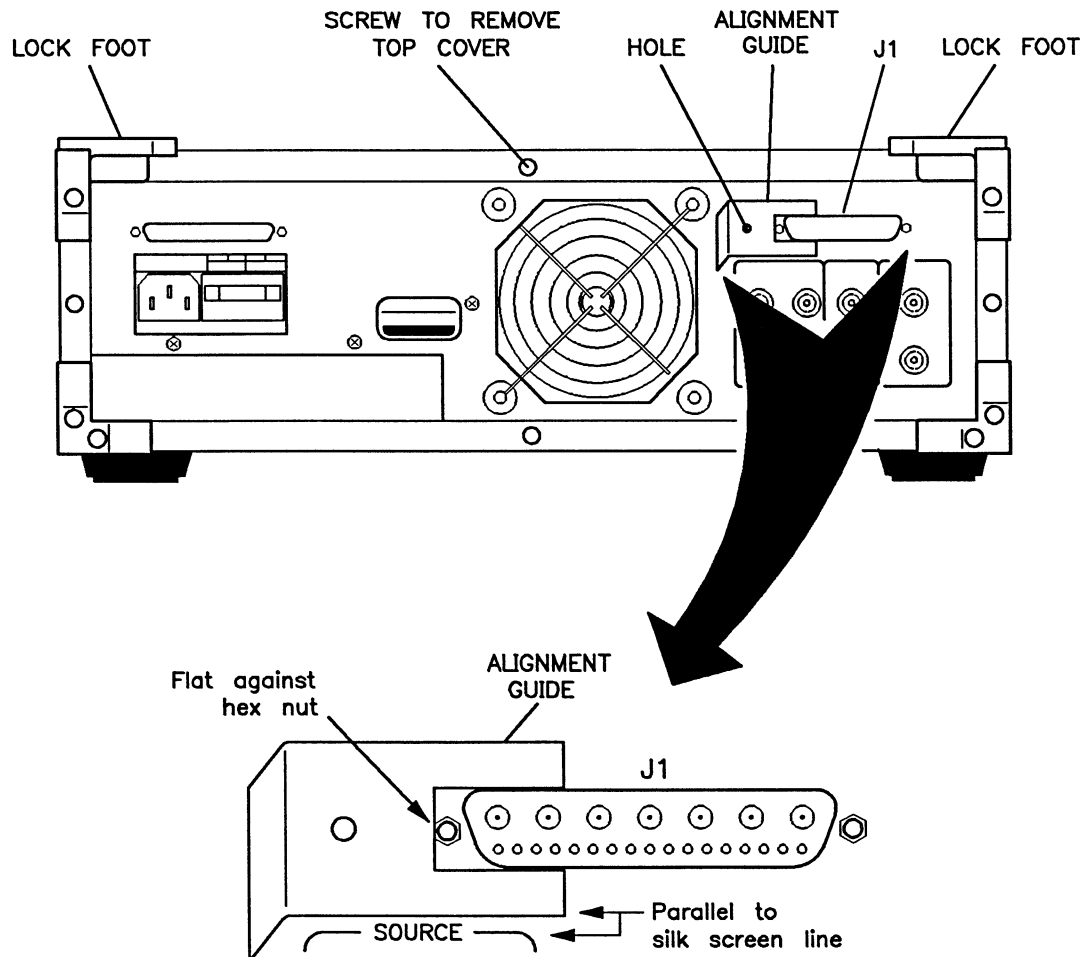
HP 85102 Rear Panel BNC Hole Location
